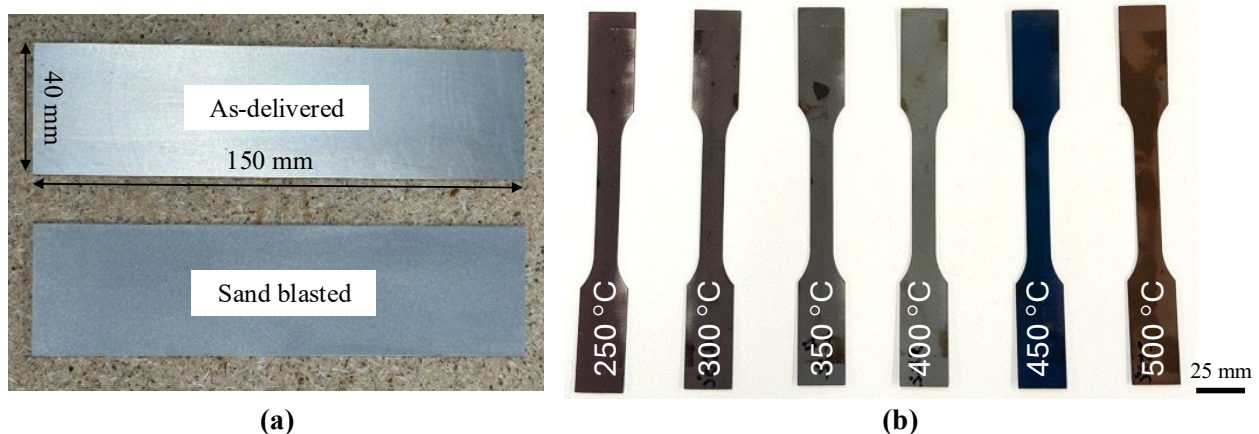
(a) Surface appearance of DP780 in the as-received condition and after sandblasting prior to stamping, and (b) surface appearance after heat treatment at different temperatures (sectioned for tensile testing).
